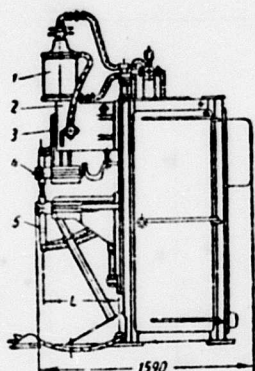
Point machine MTP-75: 1 - pneumatic cylinder; 2 - upper bracket with directing; 3 - mobile head; 4 - upper arm of machine; 5 - electrodeholder (candle); L - useful overhang of machine.
